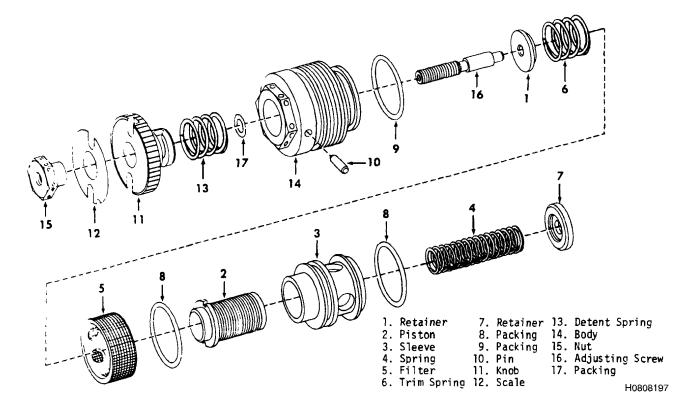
Pilot Burner Pressure Regulator Assembly
